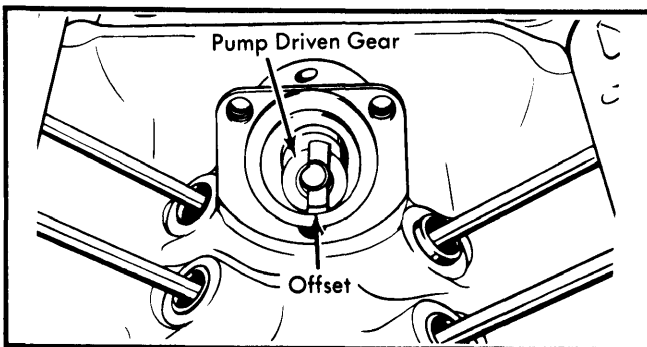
Pump Driven Gear Offset at TDC (Shown with Intake Manifold Removed)
